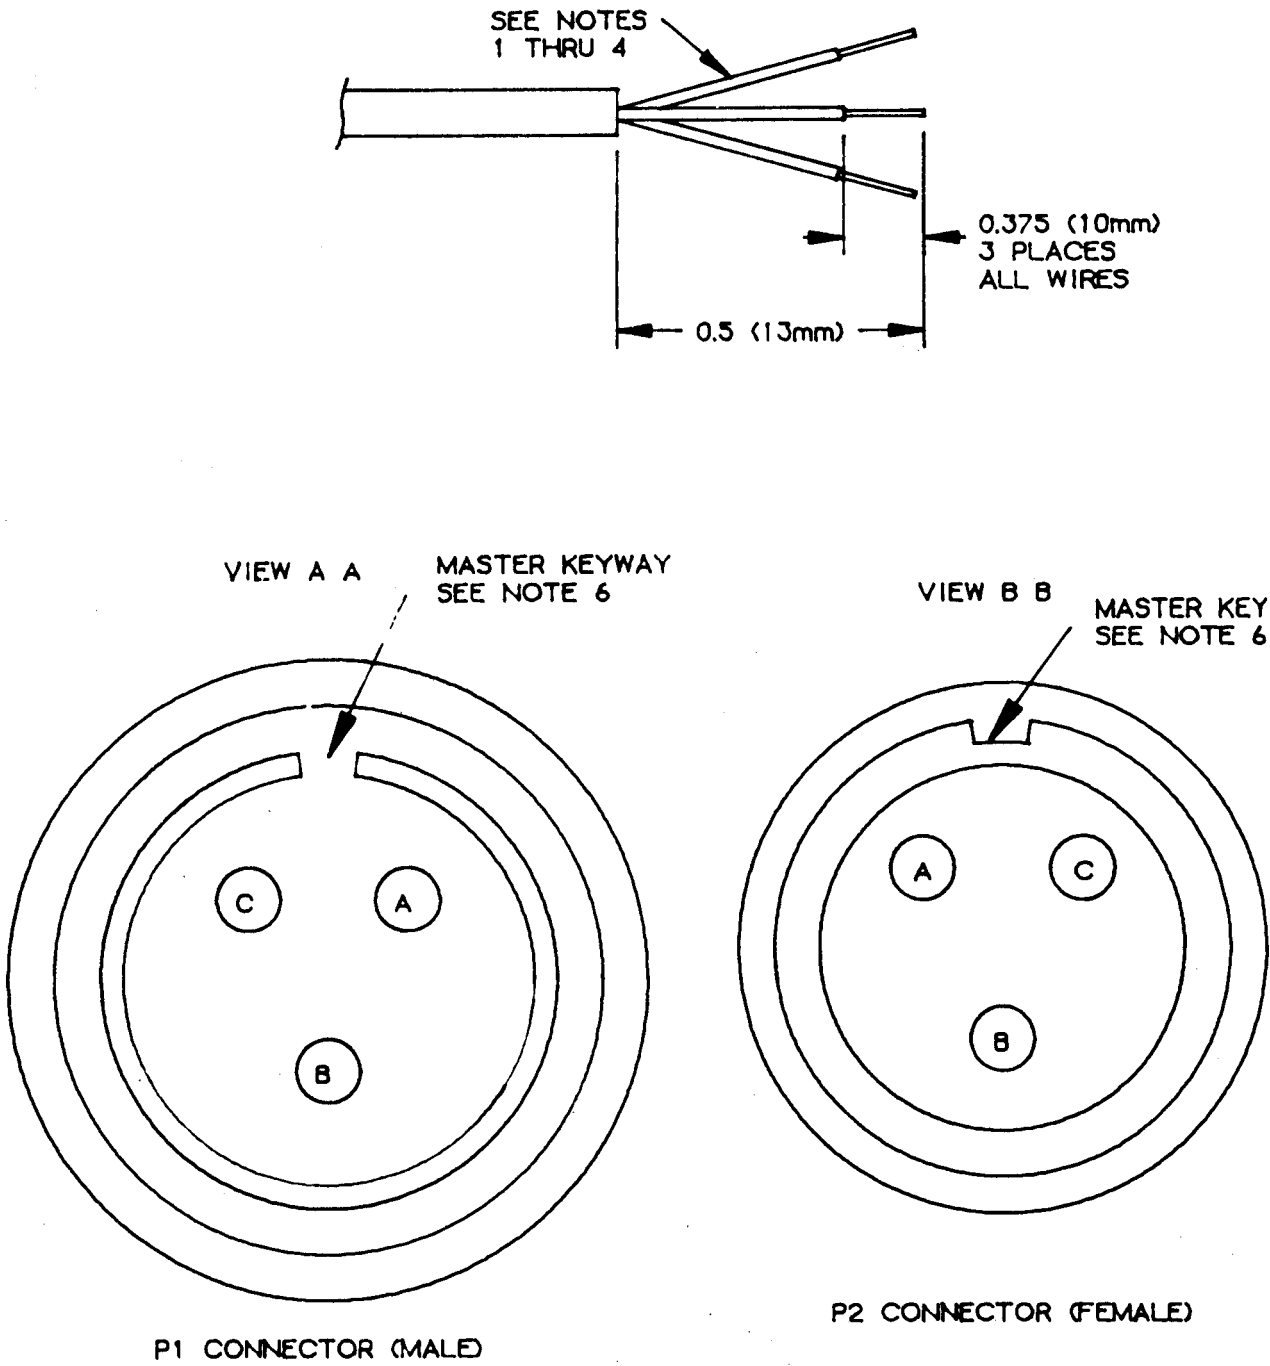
20-amp, 25-ft (7.62m) extension cable. (sheet 2 of 3)
